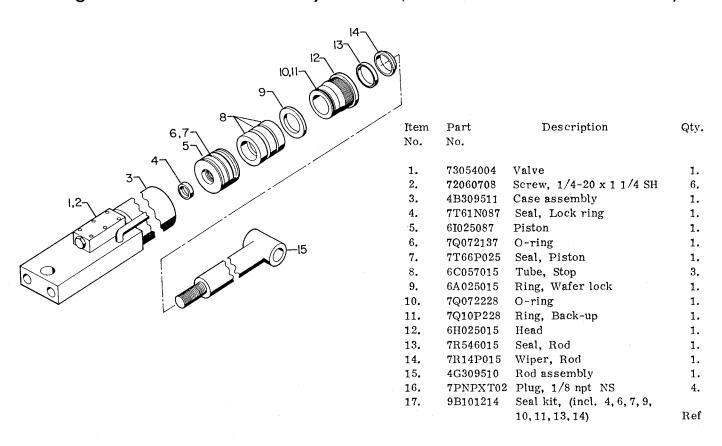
Clamp Cylinder (Part Number 3B309511C)
